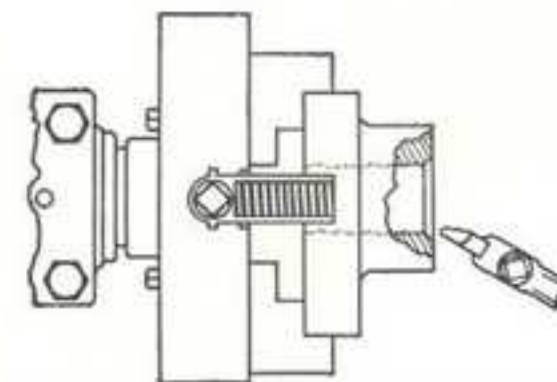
Machining a Bevel in a Cored Hole to Start Drill True
